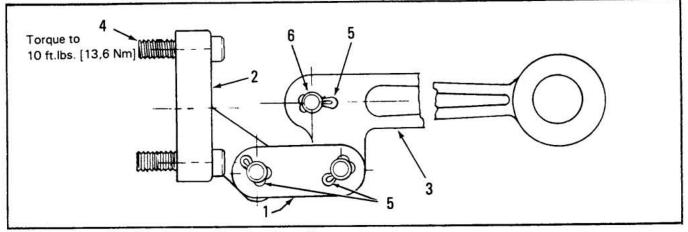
Optional Horizontal Handle and Bracket Assembly.
